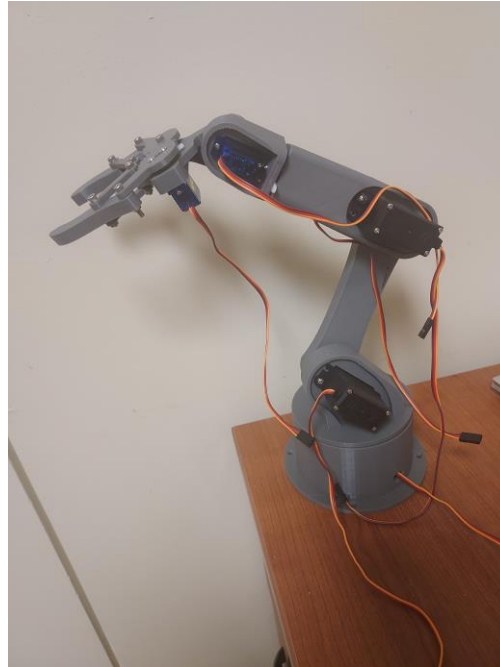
Finished assembling the 3D parts of the robotic with the Servos
